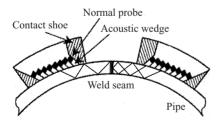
Probe layout of the multi-probe UT for ERW steel pipe
